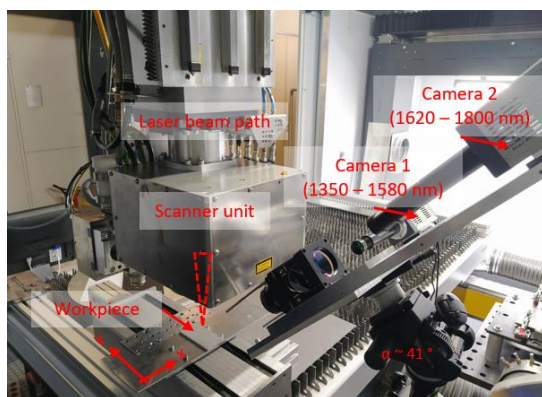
Off-axis integration of the two-color-thermography set-up into the industrial laser welding machine. The laser beam is guided in x-direction across the work piece with a scanner unit. The laser-matter-interaction zone is simultaneously observed with the two-color-thermography set-up. The set-up is inclined by approx. 41° relative to the work piece surface.
